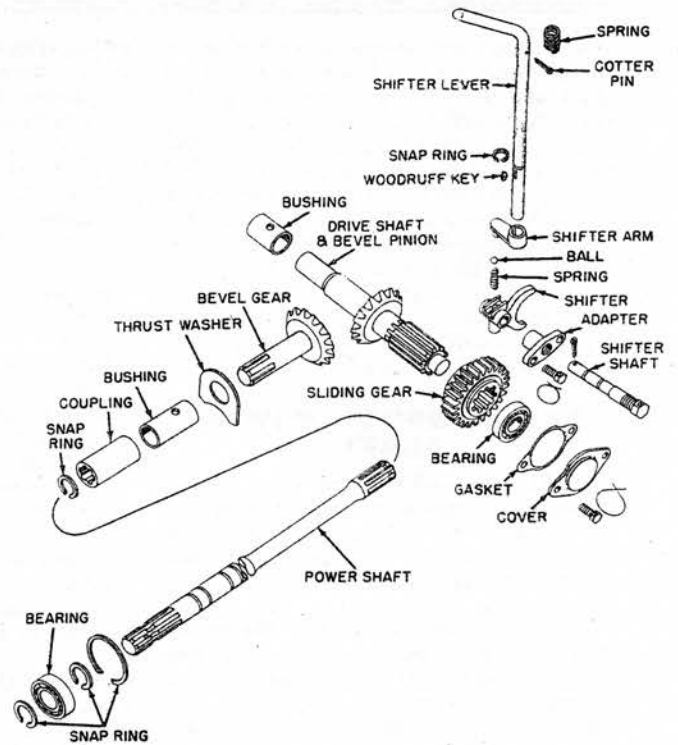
B Exploded view of Model 60 transmission-driven power shaft. Model 50 is similar
